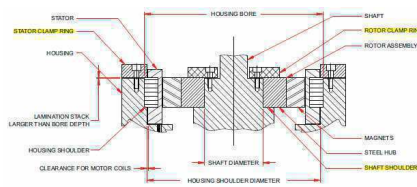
Motor Mounting Using Stator and Rotor Clamp Rings
